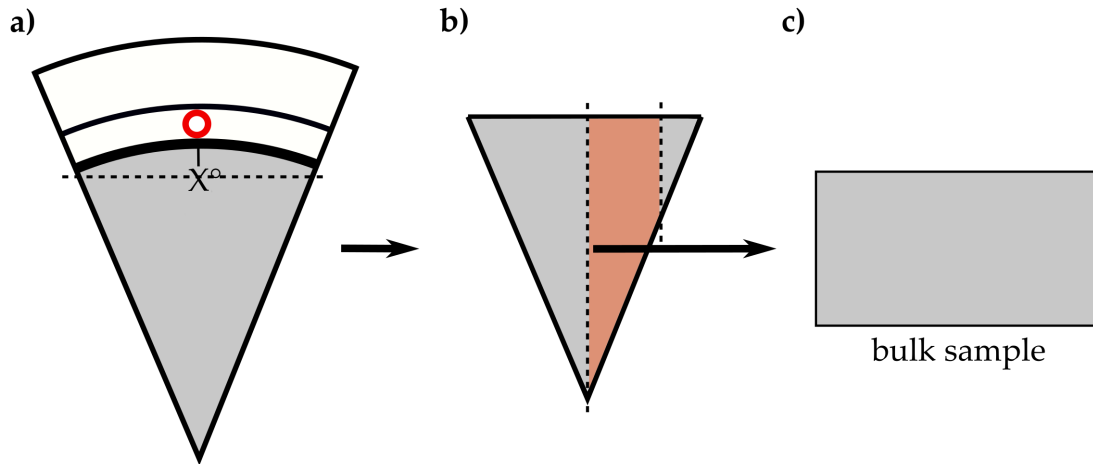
Schematic drawing of the sample sectioning procedure performed on F-side of pin journal part from X° . a) Using the triangular part resulting from step b) in Figure 3.7. b) Cutting part. c) Side view on part obtained from step described in b).
